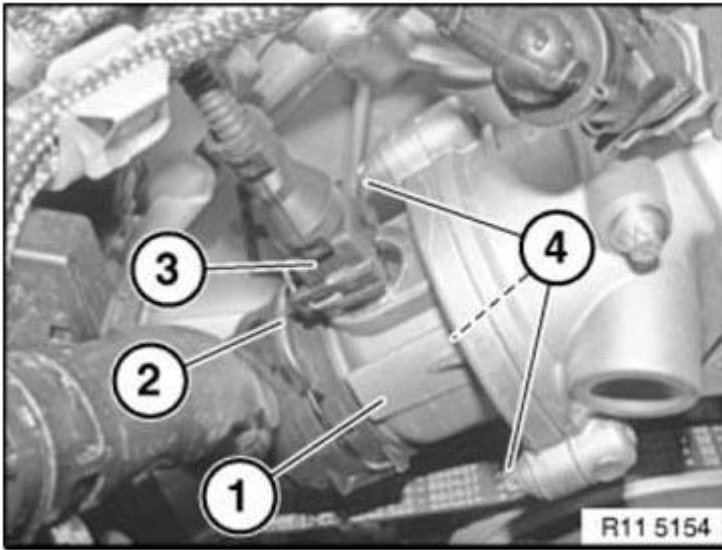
Identifying Plug Connection, Coolant Hose And Coolant Thermostat
